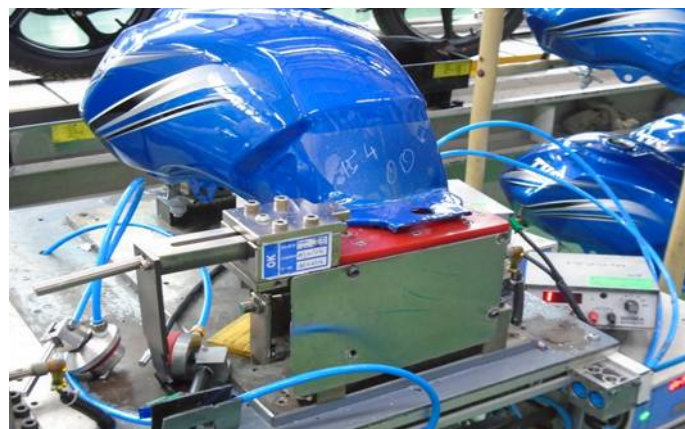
FUEL TANK LEAK TEST MACHINE AFTER IMPLEMENTATION
